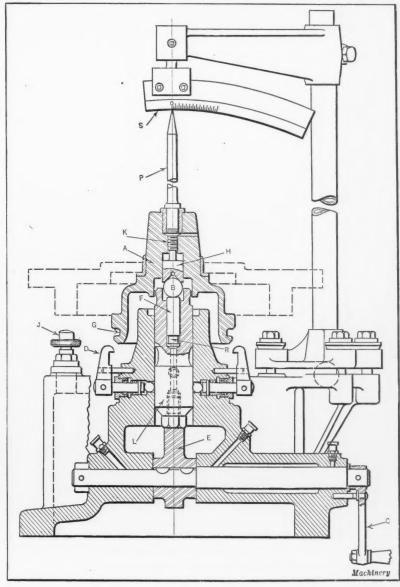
Sectional View of Flywheel Balancing Fixture showing Location of Ball
